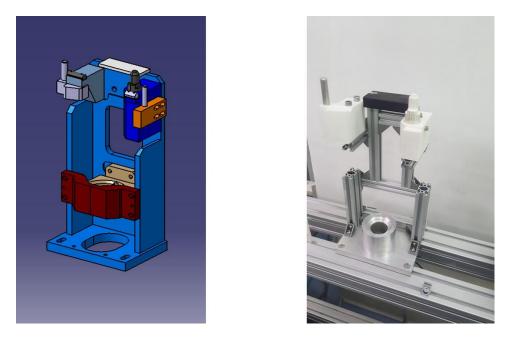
Compression machine. Left: Fixture from PSA's compression machine. Right: Fixture from LMS experimental scenario
